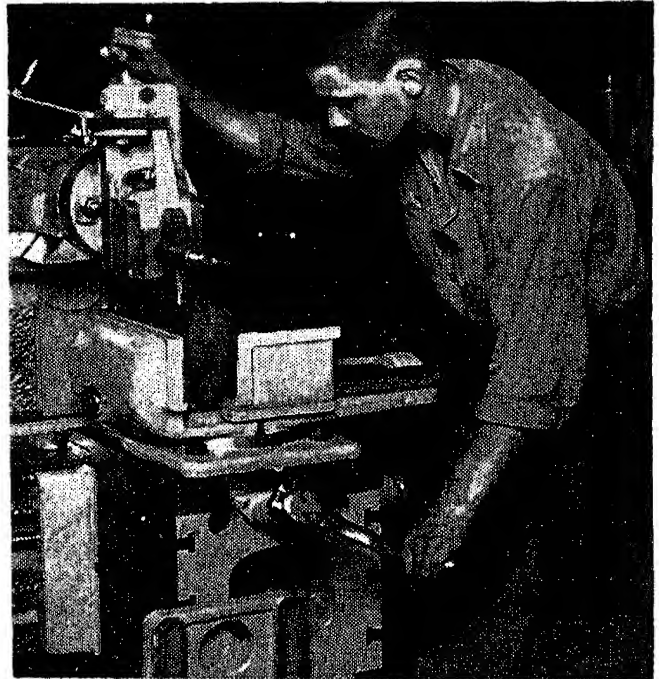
An operator guiding the tool on a shaper by manipulating the vertical and cross feeds. This machine has an auxiliary crossfeed control on the front. (Courtesy The Cincinnati Shaper Co.)
